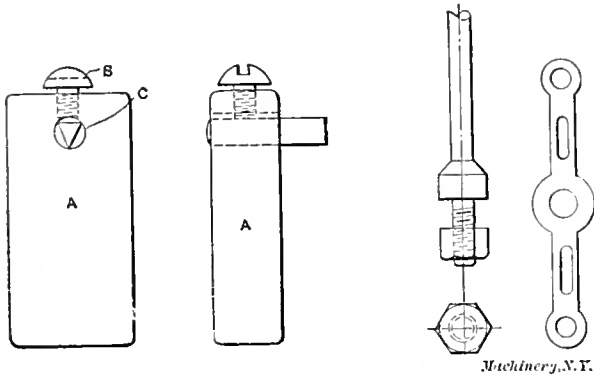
Tool for Cutting or Scraping the Edges of Thin Templates.
